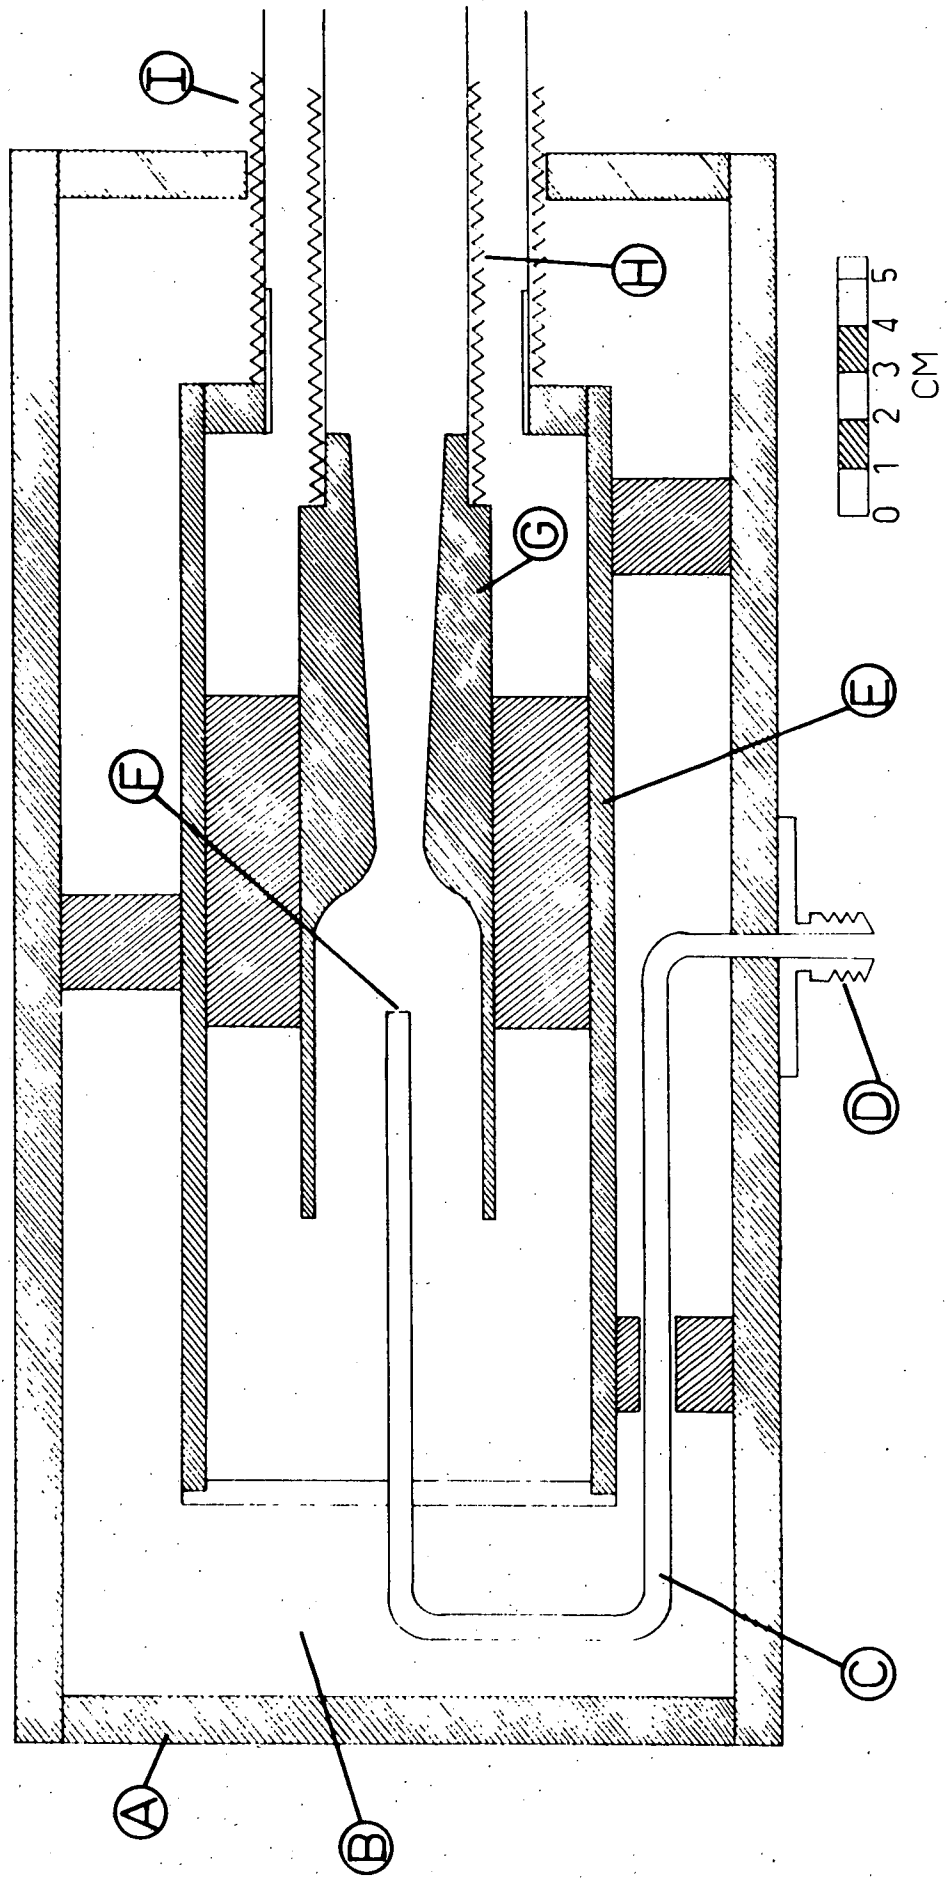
4 Sectional drawing (to scale) of cold chamber assembly; points noted are:
